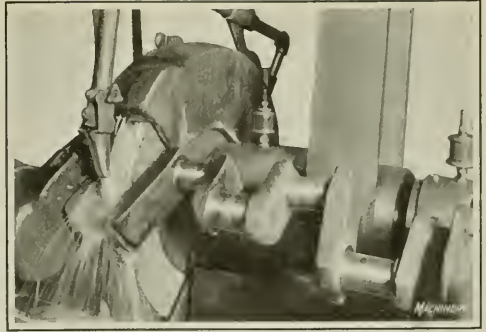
Grinding Crankpins on a Double-head Type of Machine
